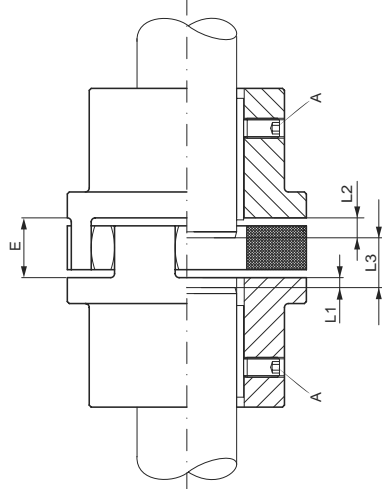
Mounting dimensions of the ROTEX coupling at the HSS (input shaft) – motor adapter
